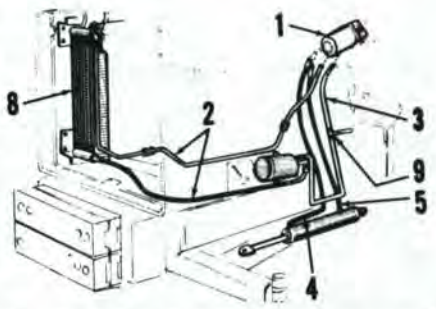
Drawing showing components of hydraulic power steering system. No mechanical linkage is used between the steering wheel and tractor front wheels. Note that the components are not located in position in which they are installed on tractor. Cooler (8) is not used on D-21 models.
